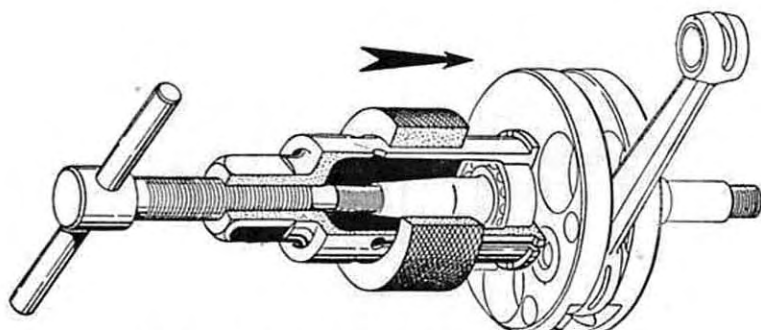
Removal of Ball-Bearing from Crankshaft.
